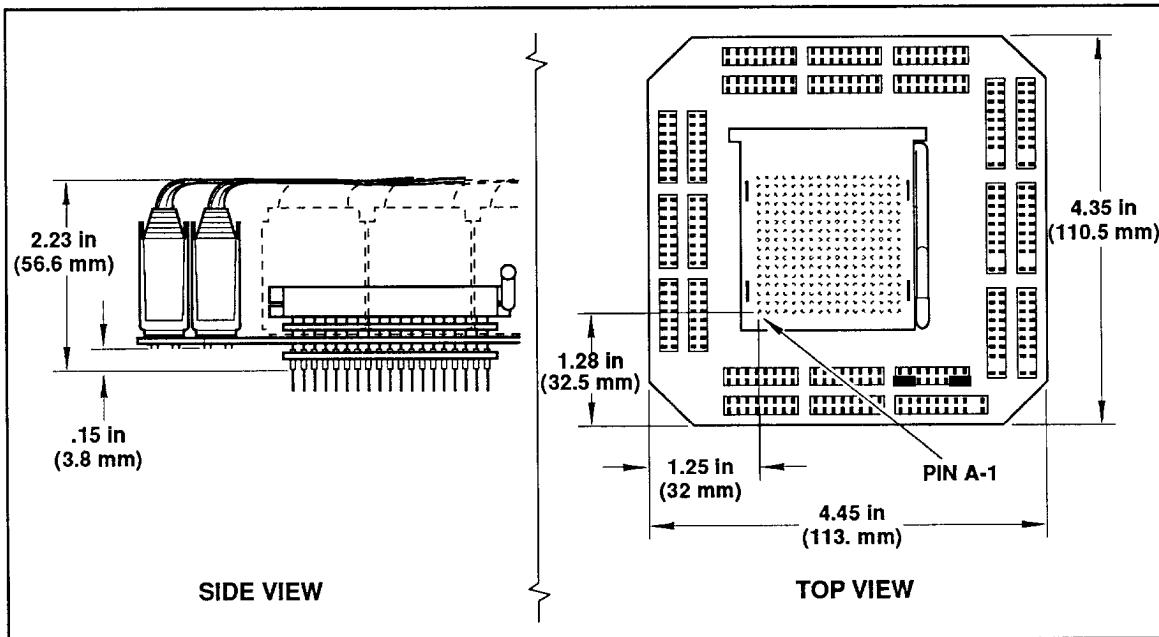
Dimensions of and minimum clearances for the probe adapter with 8-channel probes attached.
